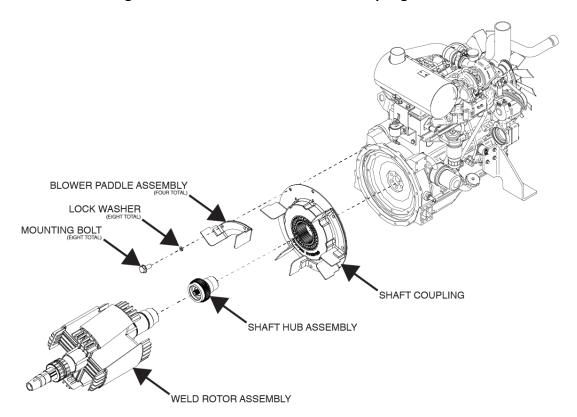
Weld rotor and shaft coupling removal
